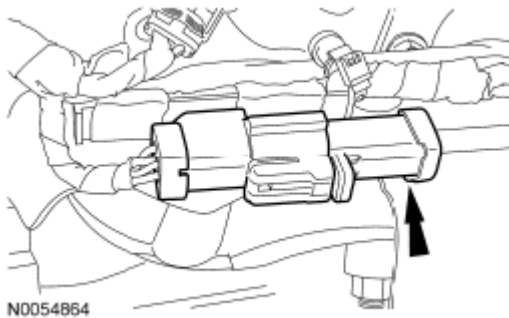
Locating RH Heated Oxygen Sensor (HO2S) Electrical Connector
